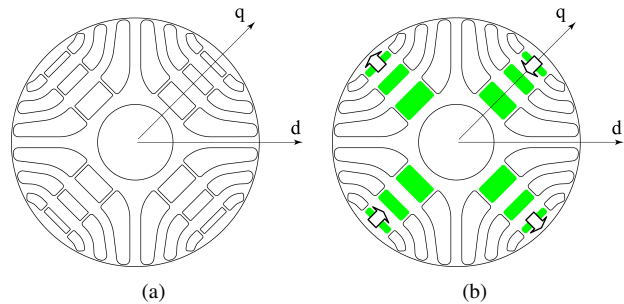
Sketch of the rotor laminations of the two test motors: a) SyR; b) PMASR.
